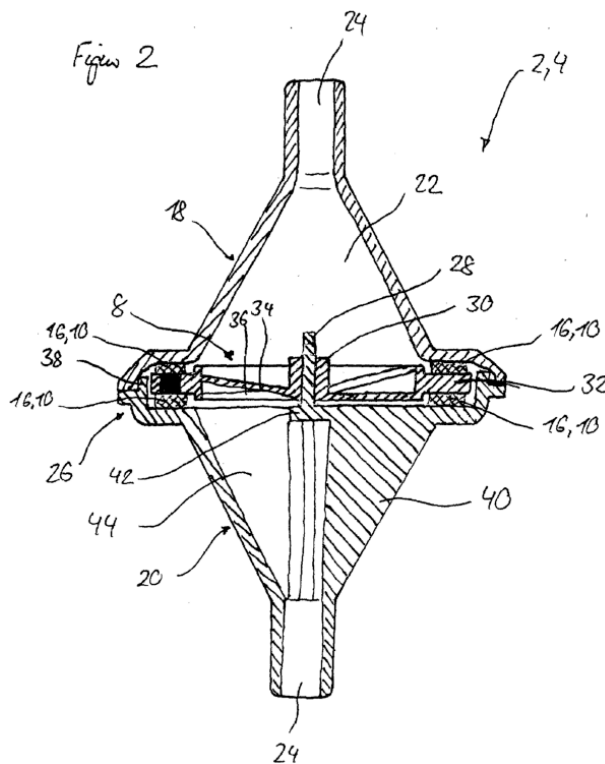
depicts a longitudinal section of a feed pump. *Id.* ¶¶ 15–16. As shown, pump 2 includes housing 6 (with halves 18, 20), rotor 8, and drive coils 10. *Id.* ¶¶ 21–25. Stephan explains that rotor 8 and housing halves 18, 20 may be made of injection molded synthetic material, with drive coils 10
